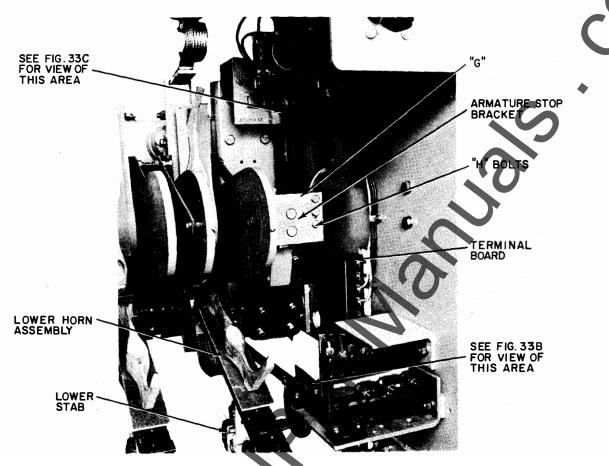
A. IC2814-E120 high-voltage contactor with arc-chute removed
